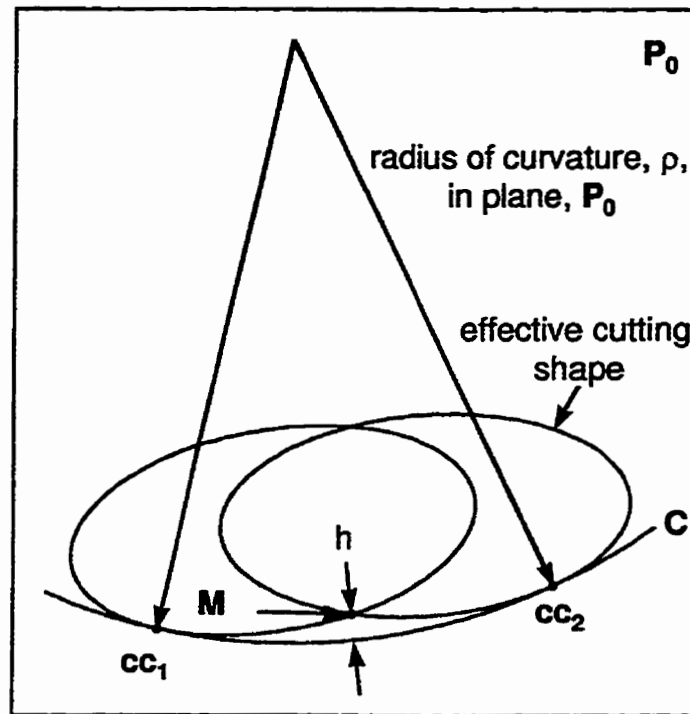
Scallop height estimation when surface machining in 5-axis with a flat end mill.
